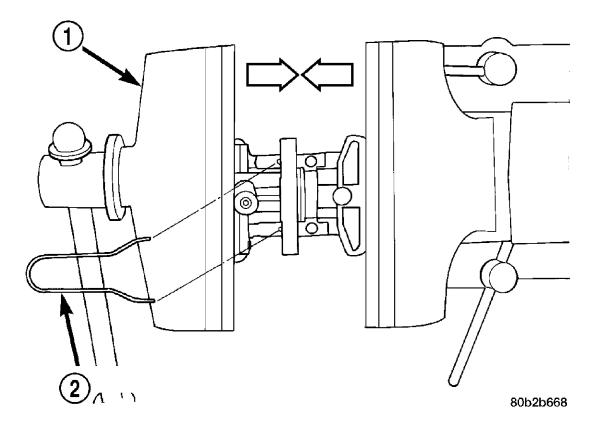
Locking Camshaft (Secondary) Chain Tensioner Courtesy of CHRYSLER LLC
